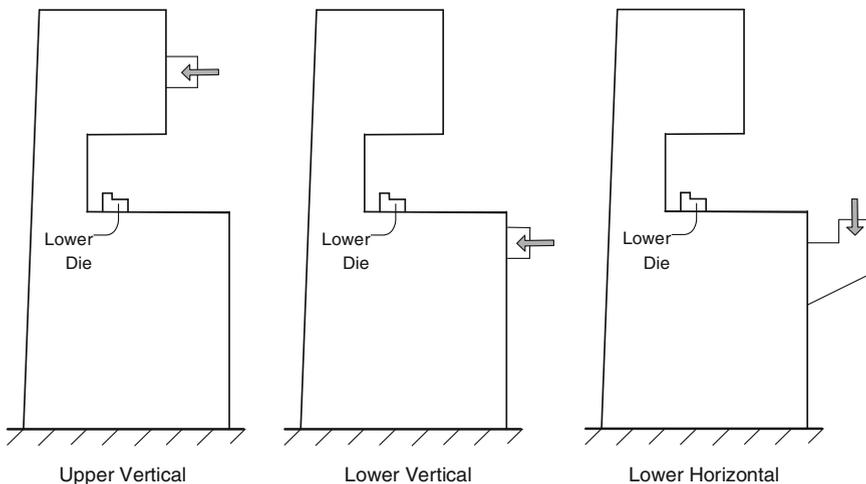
Side views of simulated press indicating three palm-button placements and direction for pushing buttons
